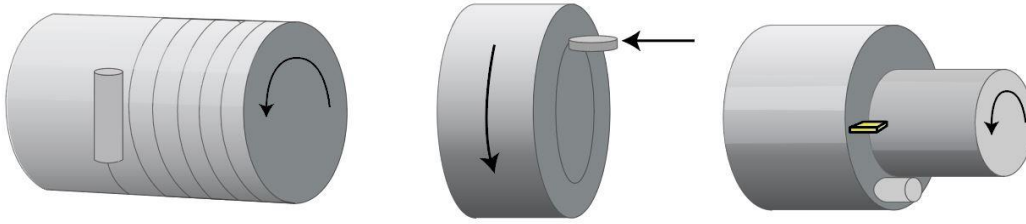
Machining tribometers: Left) Hedenqvist [27], Centre) Grzesik [28], Right) Olsson [30], adapted from [29].
